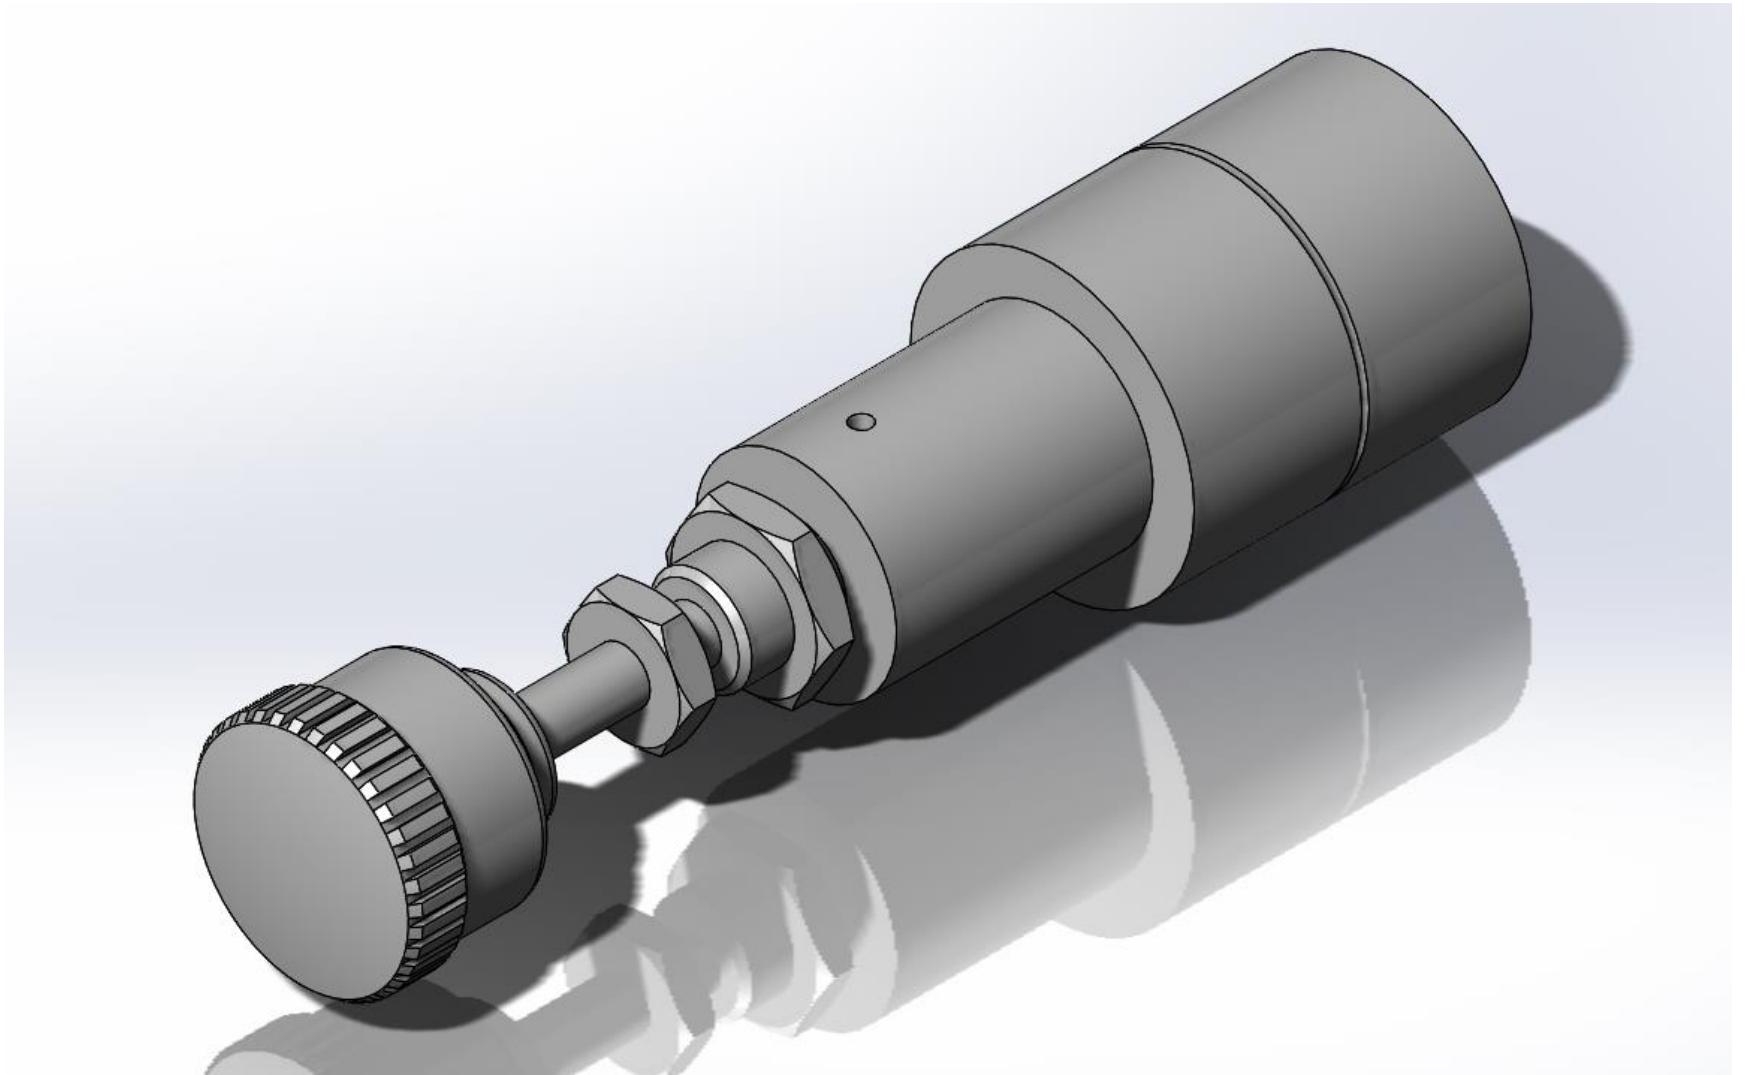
Part 1017 (Panel-Mount Compressed Air Regulator) CAD Drawing
